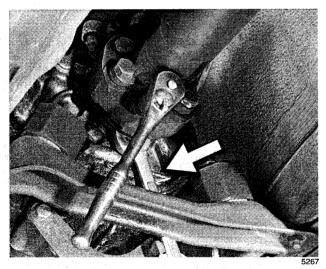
Front driveshaft to transmission mounting bolt being removed. Note open-end wrench (arrow) being used to counterhold bolt.
